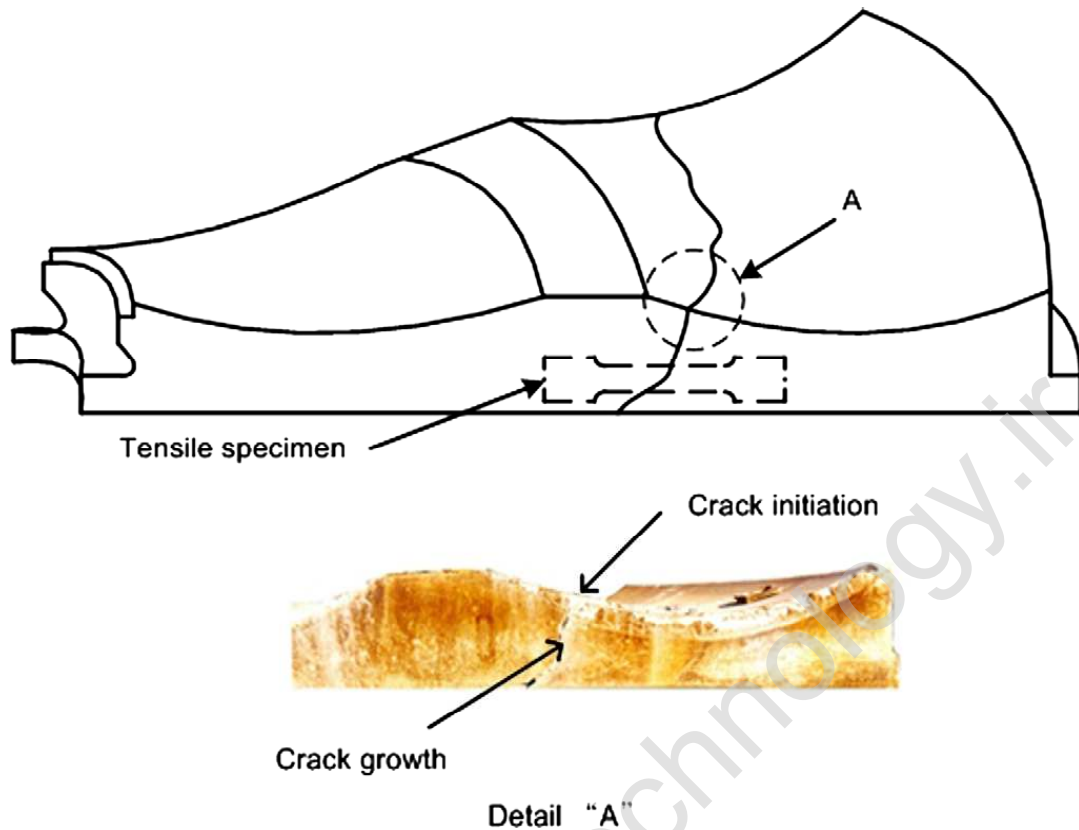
Sampling direction of tensile and bending specimen and fracture process of table liner.
